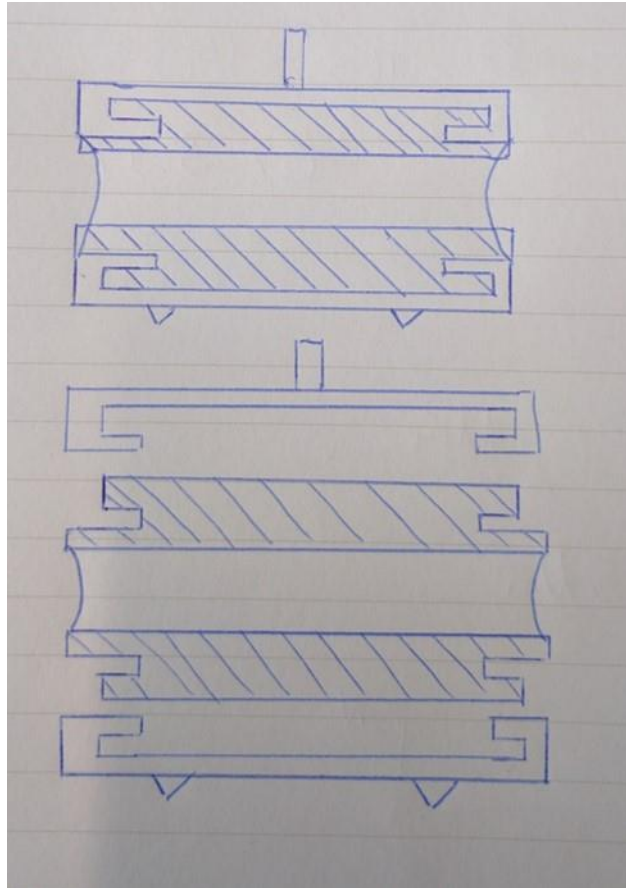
Drawing of the modular core concept assembled (top) and with the core unassembled (bottom).
